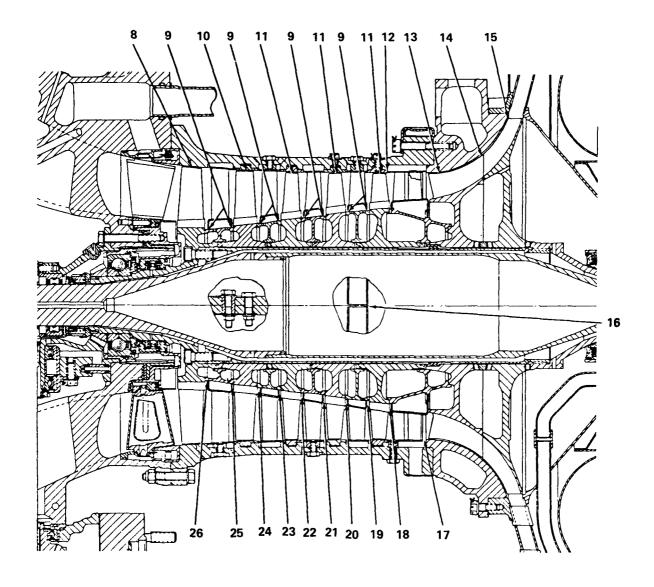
Fits, Clearance and Backlashes (T53-L-13B/703 Engines) (Sheet 2 of 4)
